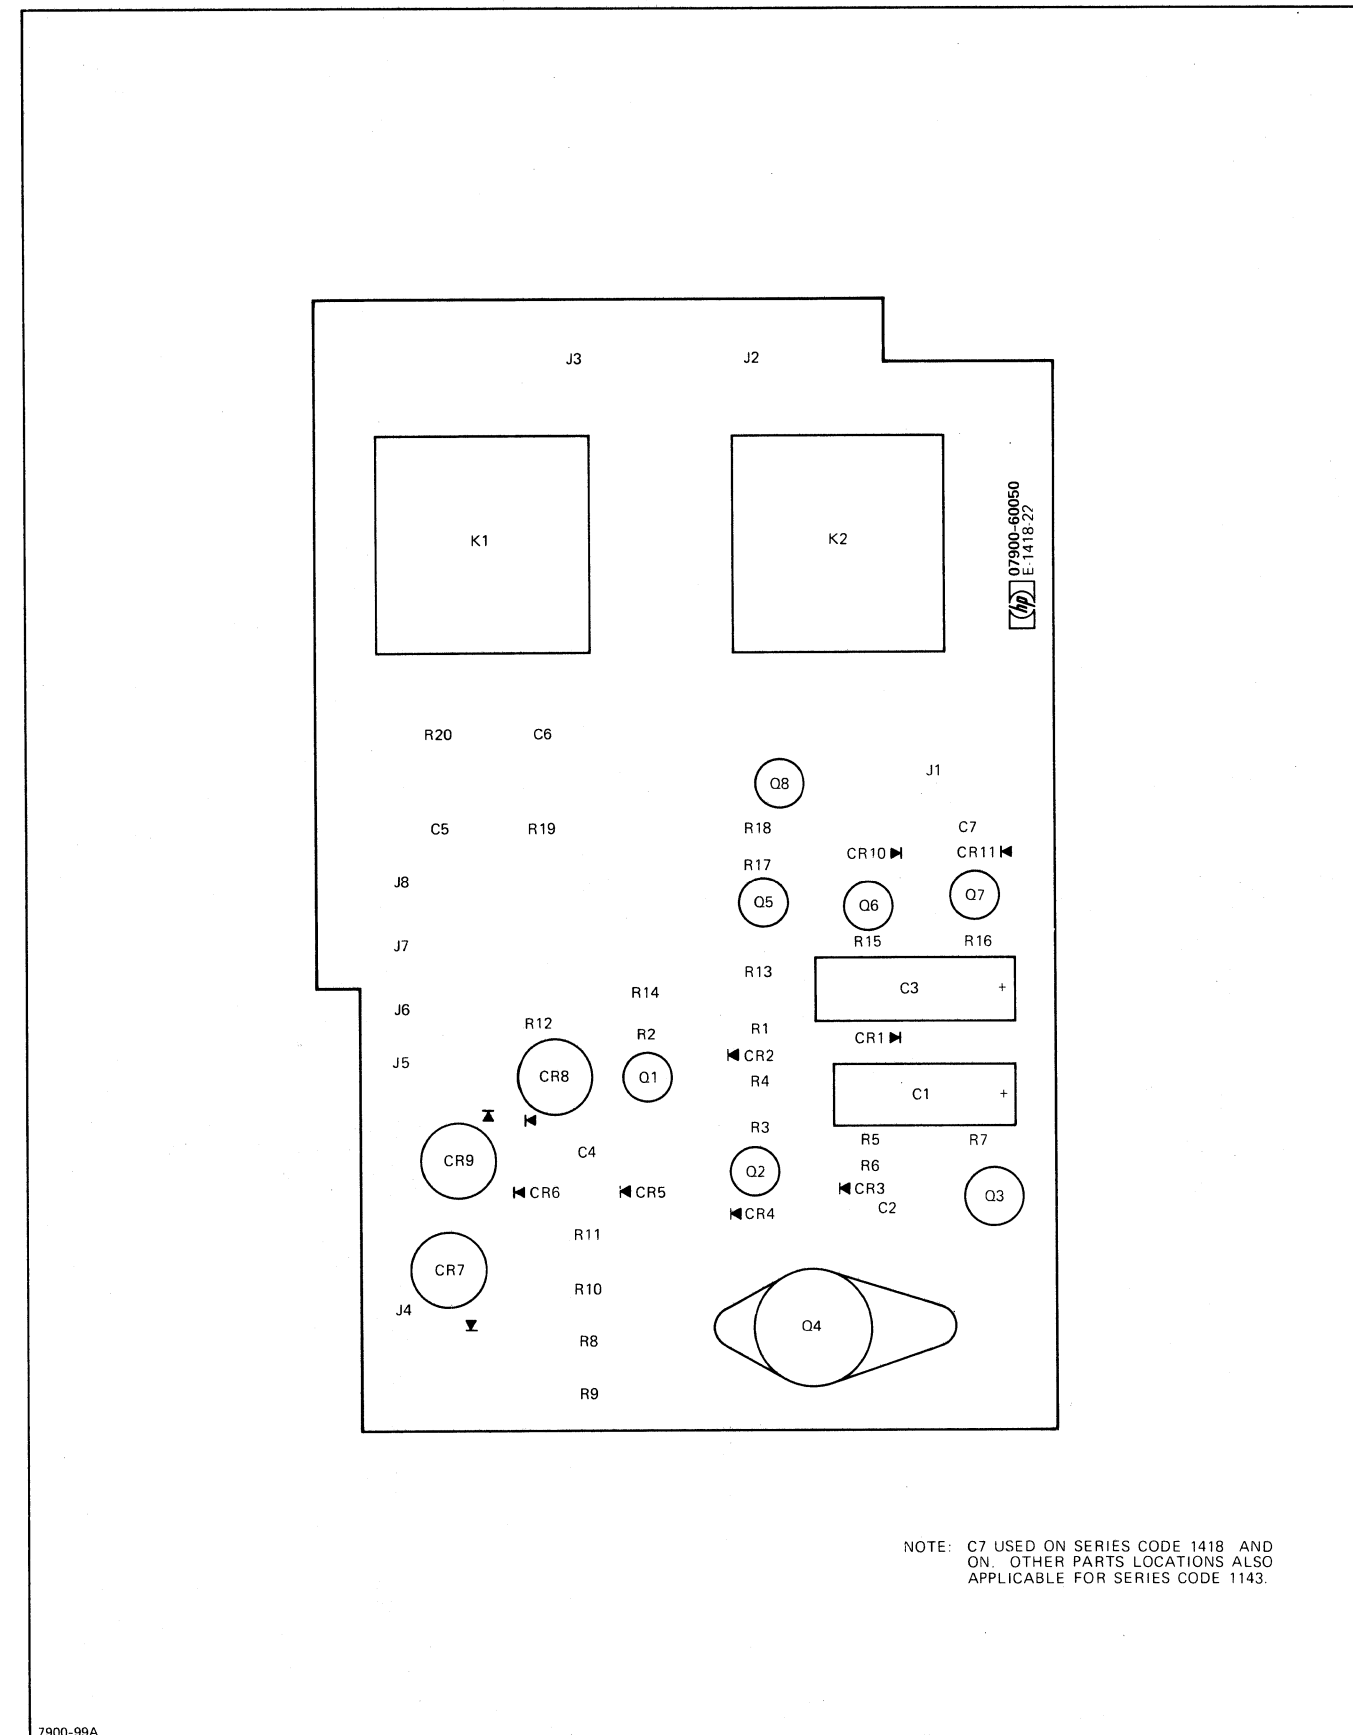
DC Brake Assembly A14 Parts Location Diagram
